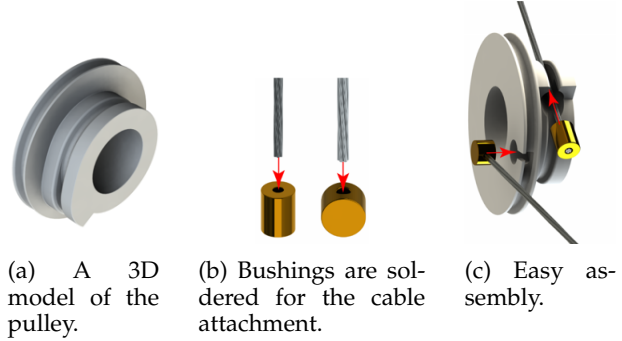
Changing the travel distance is achieved by the wheel and axle principle. The input and the output cables are sitting on different radii [8].
